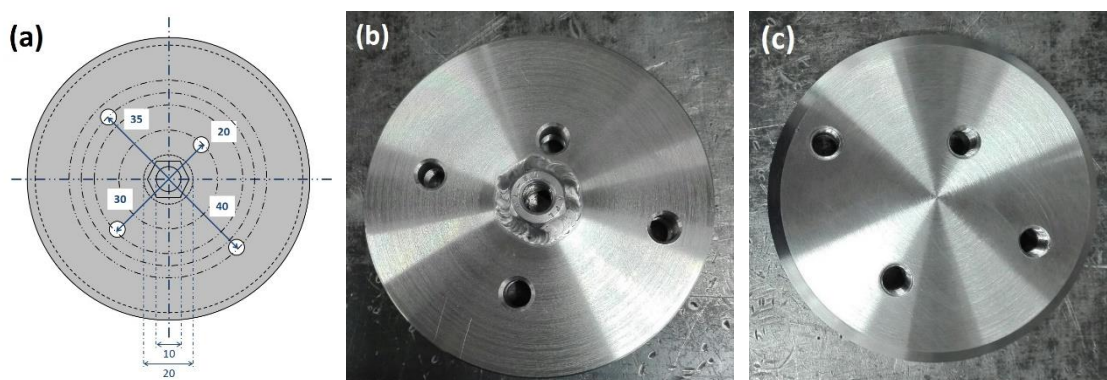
(a) Diagram of the reactor's bottom (dimensions in mm); (b) Reactor's bottom (inner part with welded nut); (c) Reactor's bottom (outer part).
